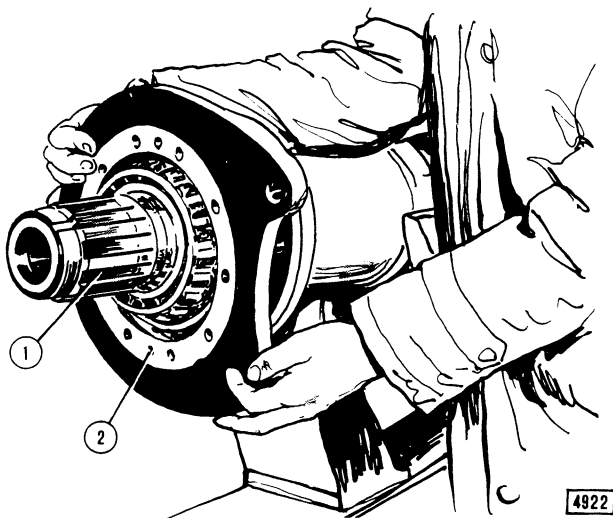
Removal of brake caliper holder plate (2) from wheel hub (1)
